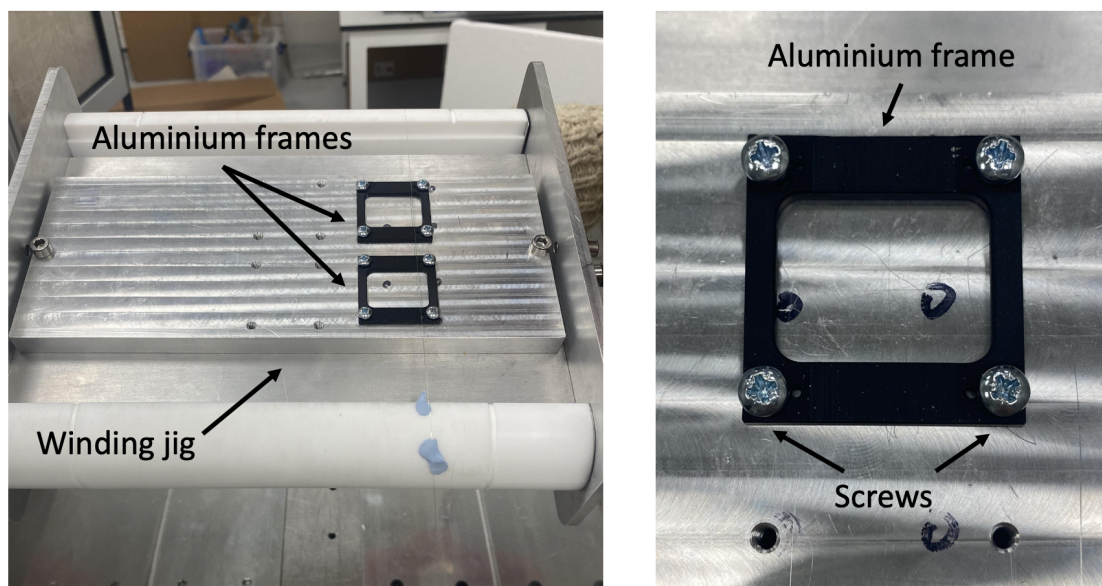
Annotated image of the winding jig used to manufacture the scintillating fibre detectors, showing two aluminium frames secured with screws on one of its sides.
